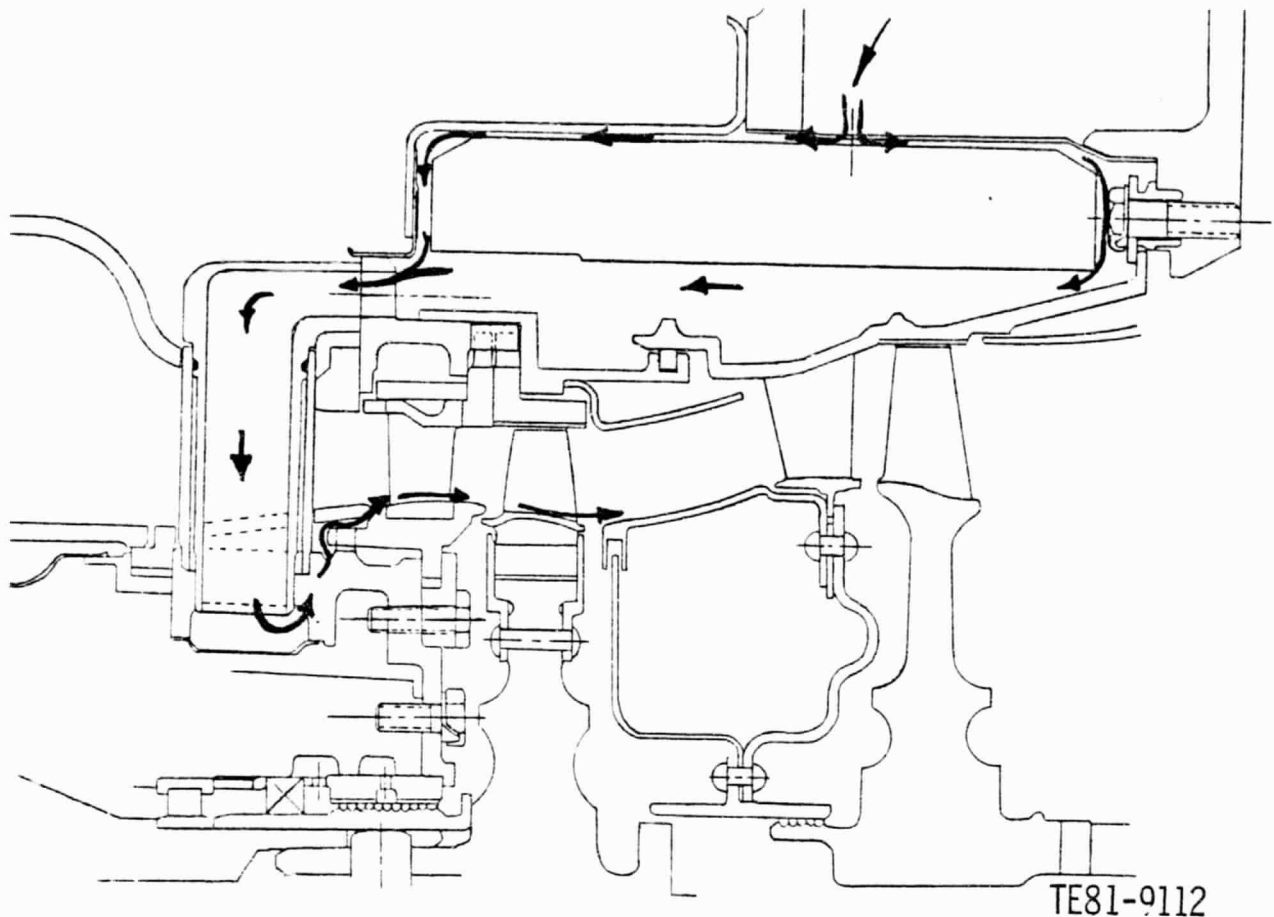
Original 2070°F-configuration gasifier turbine nozzle cooling system, used with compressor discharge air block cooling.
